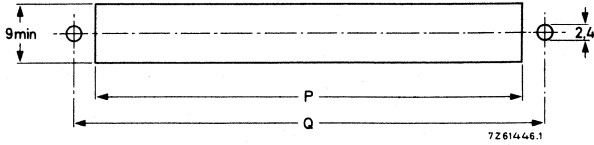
Hole pattern for panel mounting of male parts; see Table 4 for dimensions P and Q.
